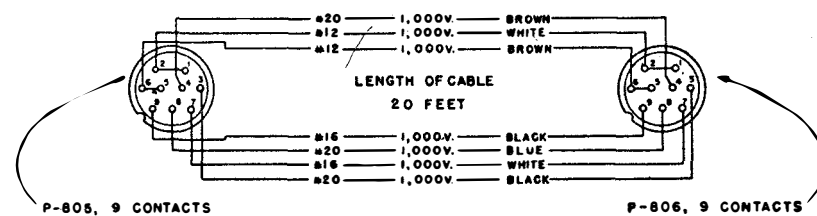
Interconnecting Cables. Schematics and Assembly.
